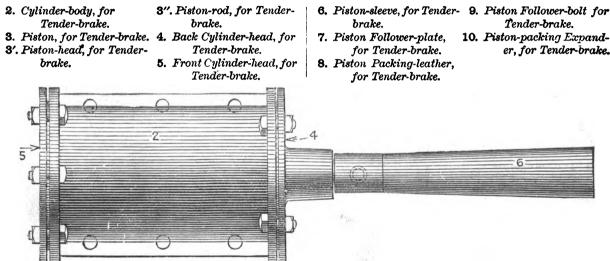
BRAKE-CYLINDER, for Westinghouse Automatic Tender-brake.
